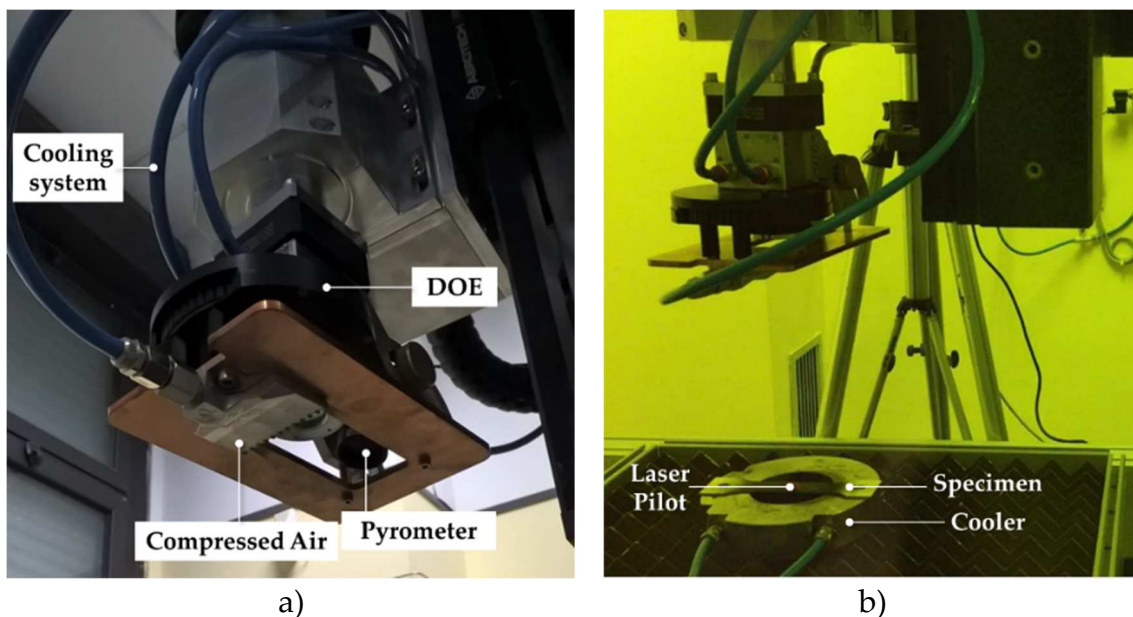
LHT tests on AA6082-T6 tensile specimens: a) detailed view of the laser heating head, b) experimental setup
